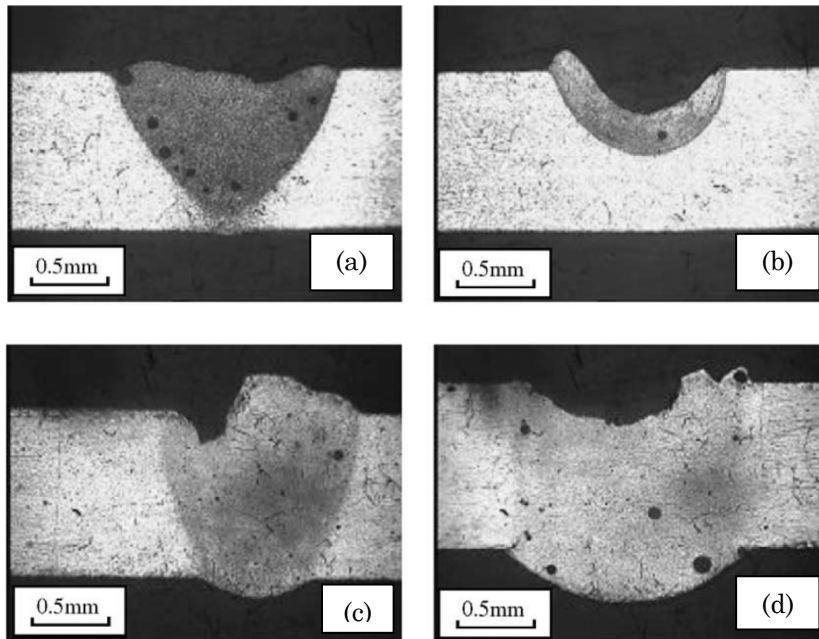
Typical defects in AZ31 laser welds [3]: porosity (a), vaporization (b), side-blow (c), weld drop-out (d)
